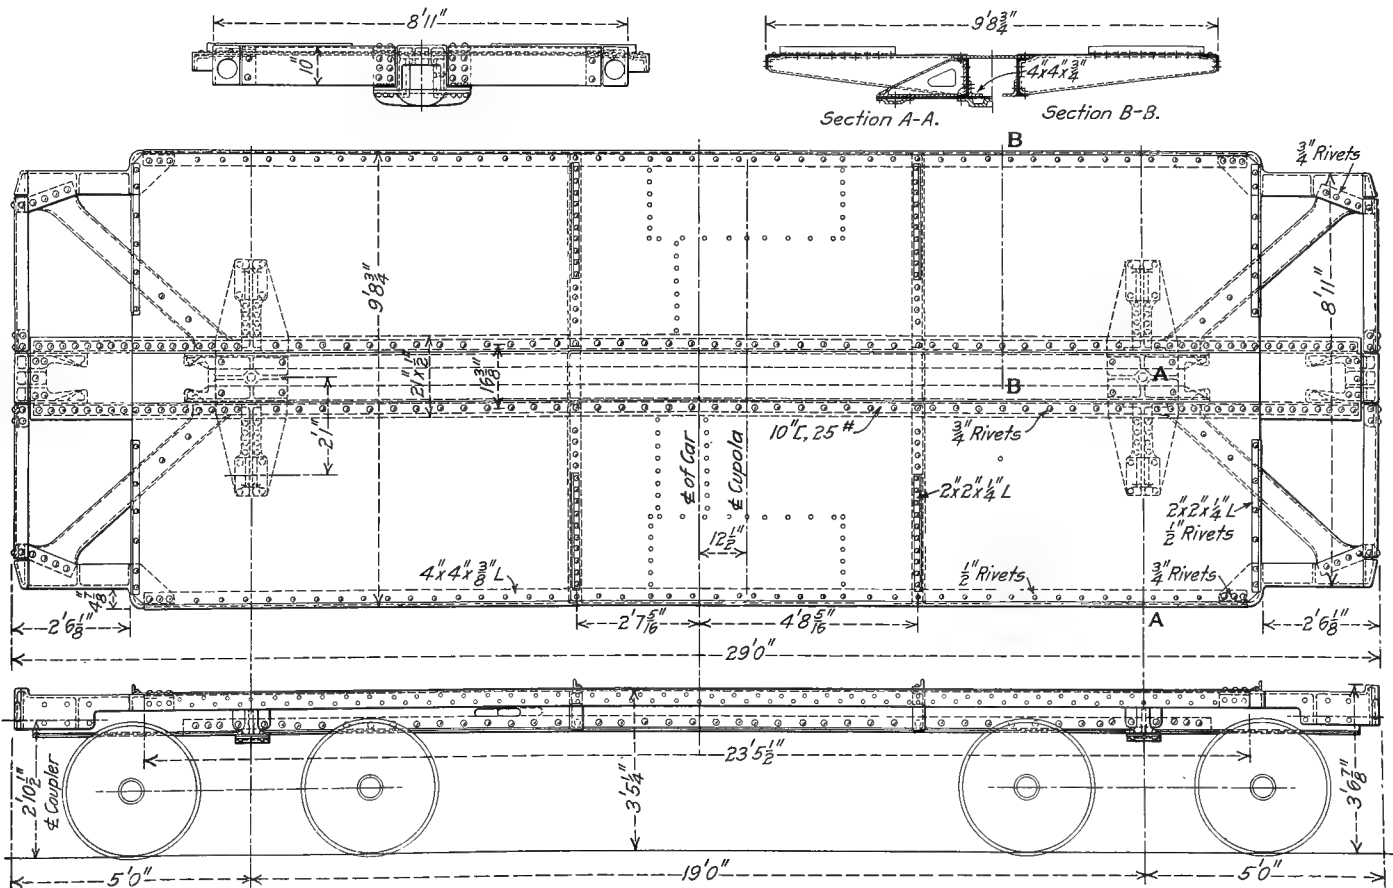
Arrangement of the Underframe of the Pennsylvania Railroad Steel Caboose Shown in Figs. 367-370.
